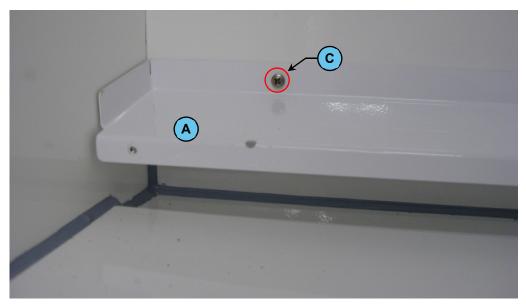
IN Back Wall Plenum Bottom Support Installed
